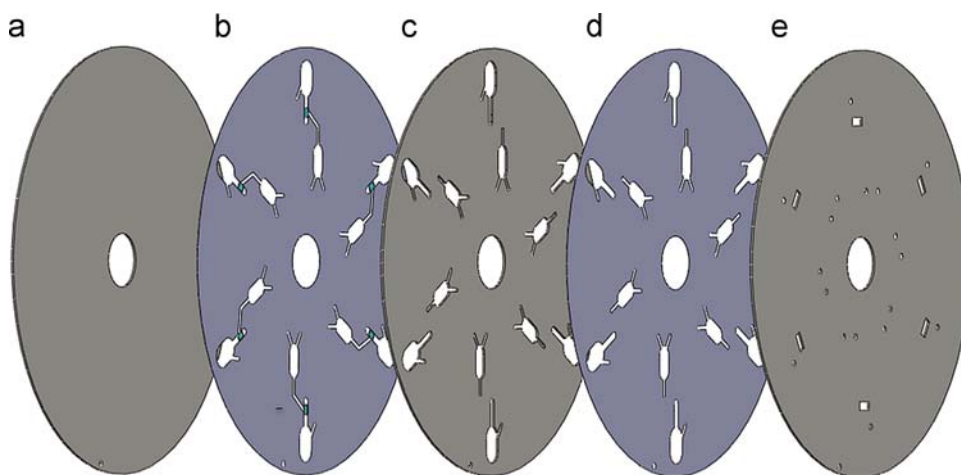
Exploded view of CM device layers: (a) 600 μm DVD base layer, (b) 100 μm adhesive layer, (c) 600 μm DVD middle layer containing reservoirs and the main channel into which the hydrocarbon gel plug is incorporated, (d) 100 μm adhesive layer containing channel leading from reservoir to plug, and (e) 600 μm DVD top layer containing air inlets and injection holes.
